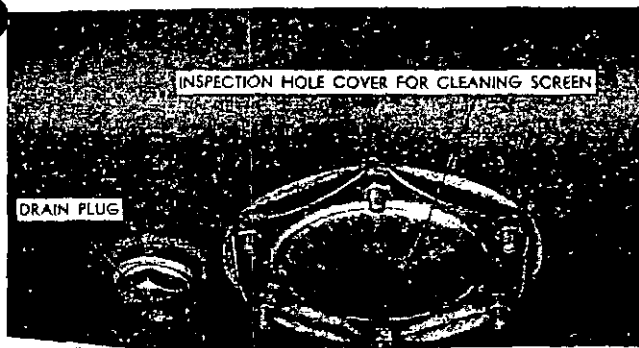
Oil Pan Drain Plug & Inspection Hole Cover
